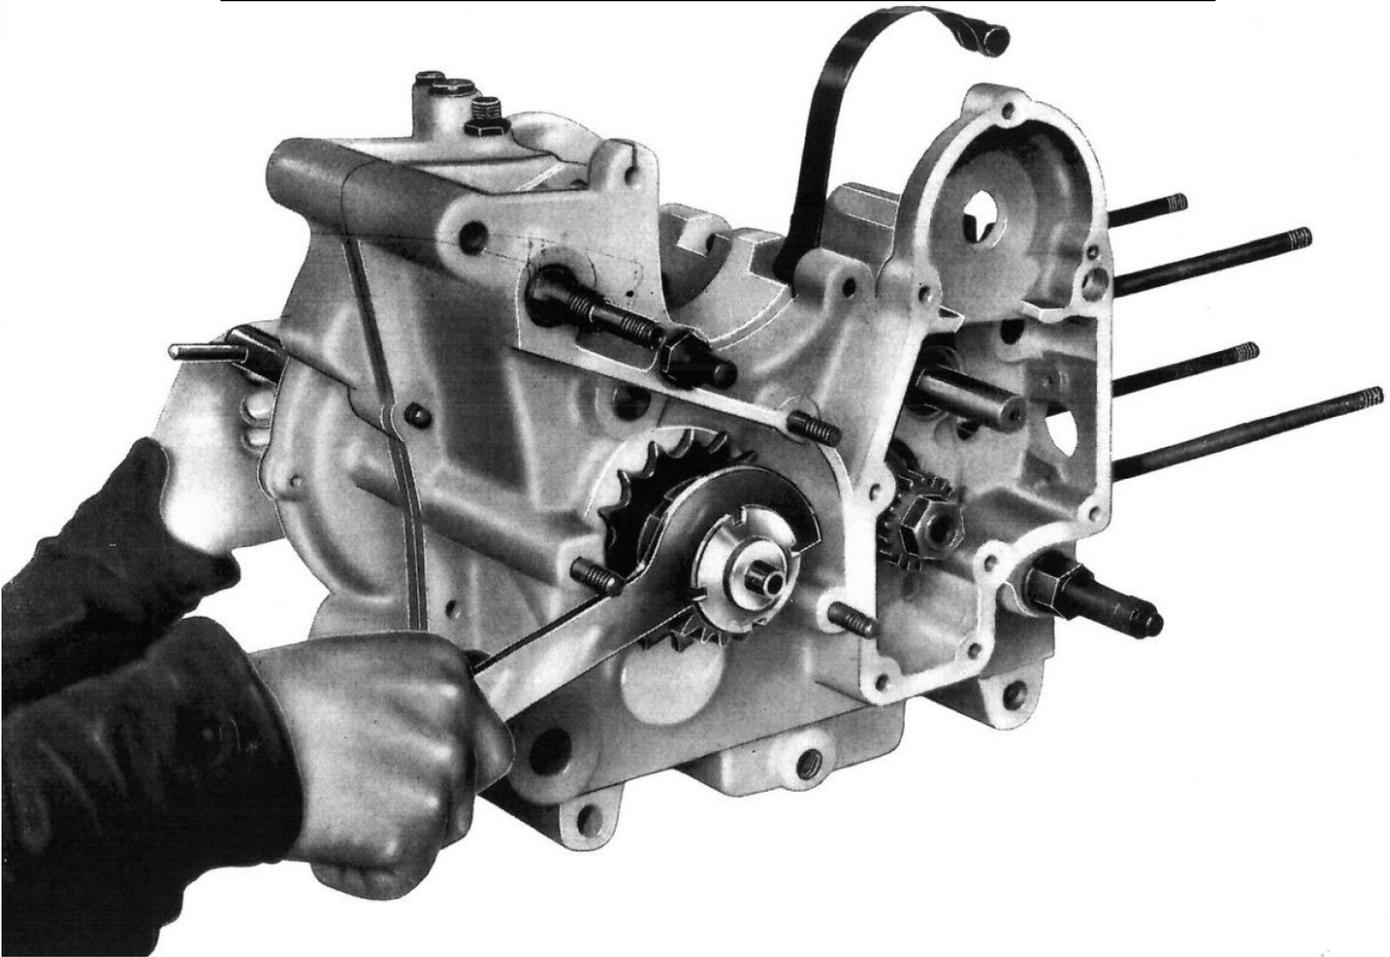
Removing the toothed sleeve (ratchet) for the kickstarter. [Flywheel lockring tool is the same size.]
